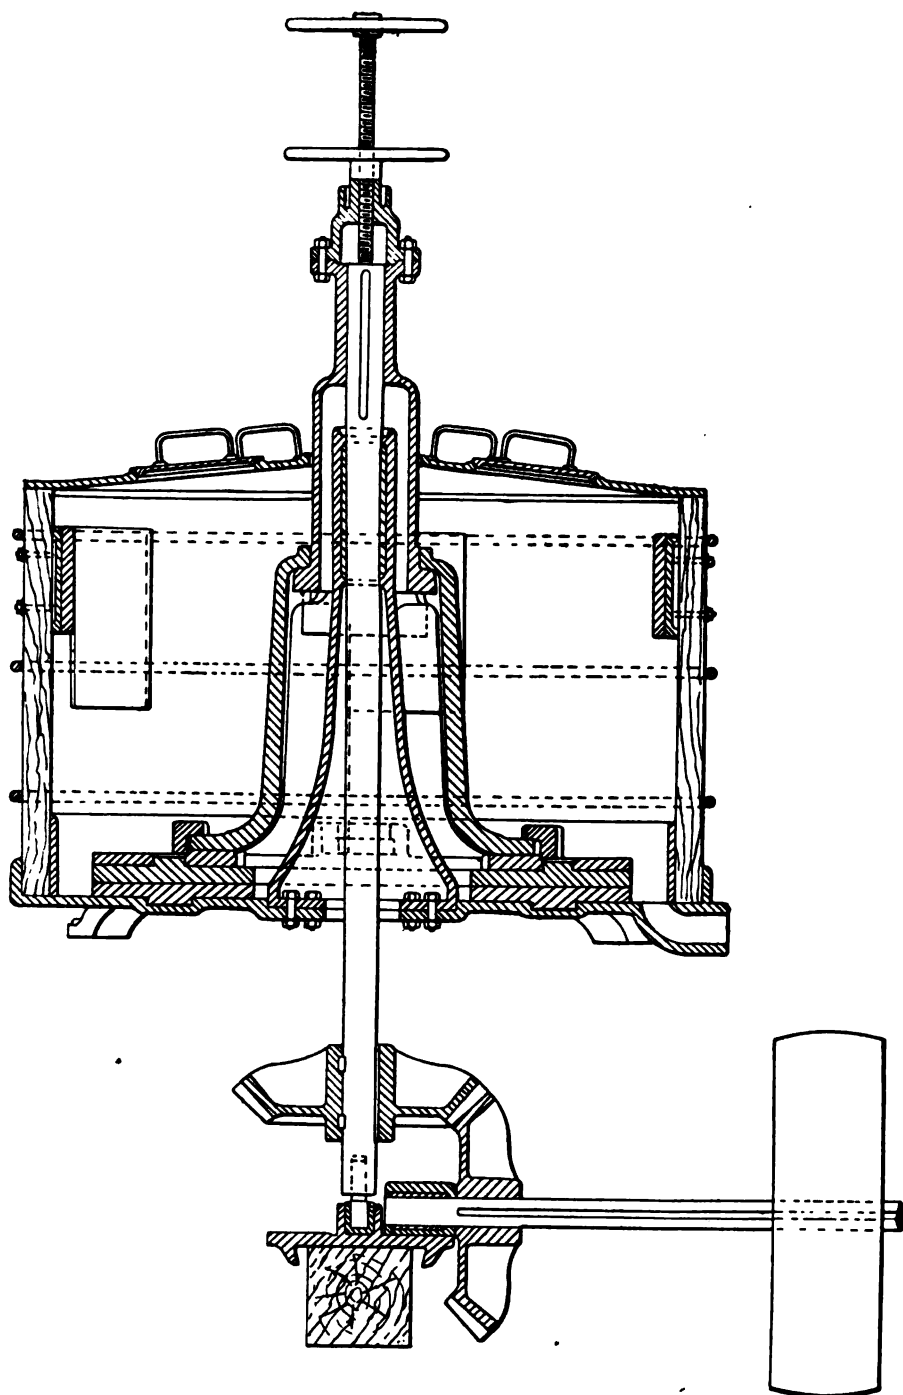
5-ft. Amalgamating Pan, Muller adjustable by Handwheel and Screw on top of the Spindle. Device for preventing Oil from getting into the Pan. Speed of Muller, from 65 to 75 revs. per minute. (Messrs Fraser & Chalmers, Ltd., Erith.)
